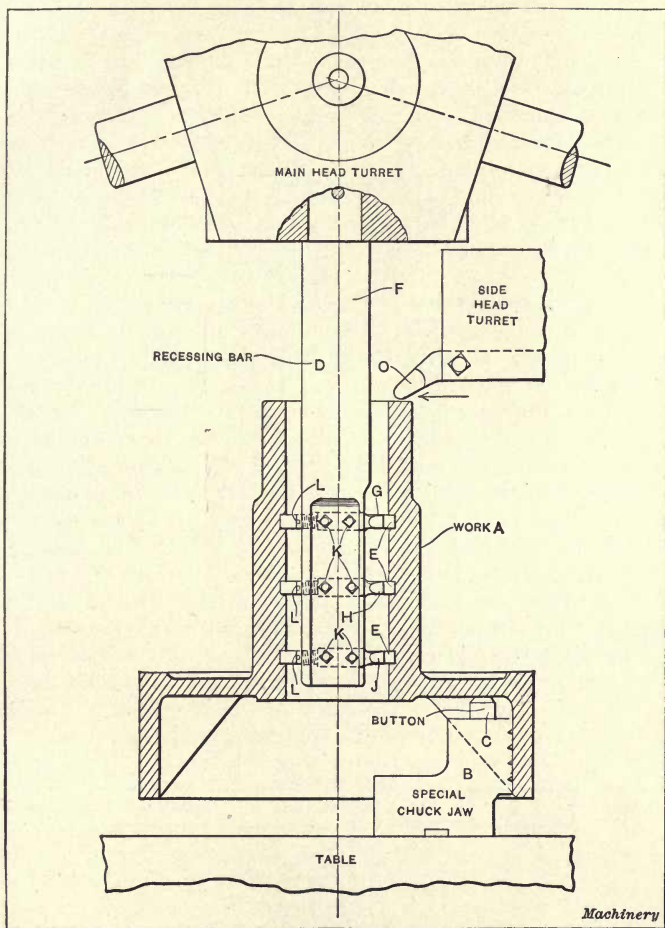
A Multiple Recessing Tool used in a Vertical Turret Lathe
